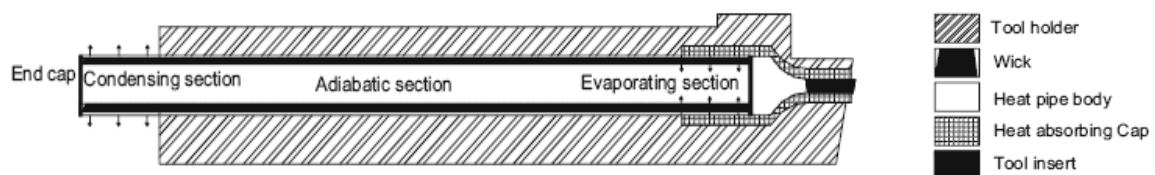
Scheme of heat pipe inside the tool-holder (Haq and Tamizharasan, 2005)
